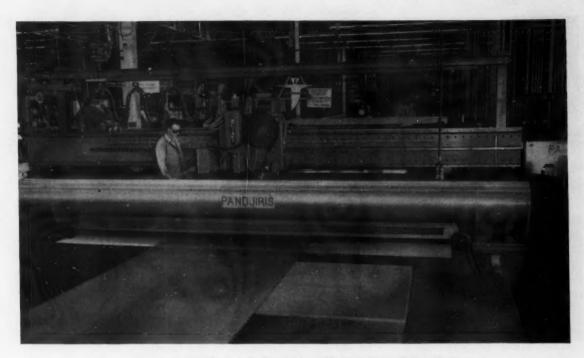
Welding machine constructed for welding several sheets together to obtain required widths. Any length can be fabricated.
